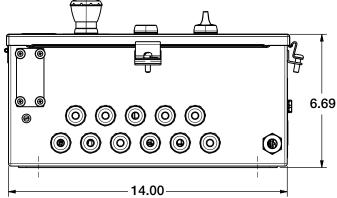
Flexweigh 101 Basic Filler Enclosure Dimensions
